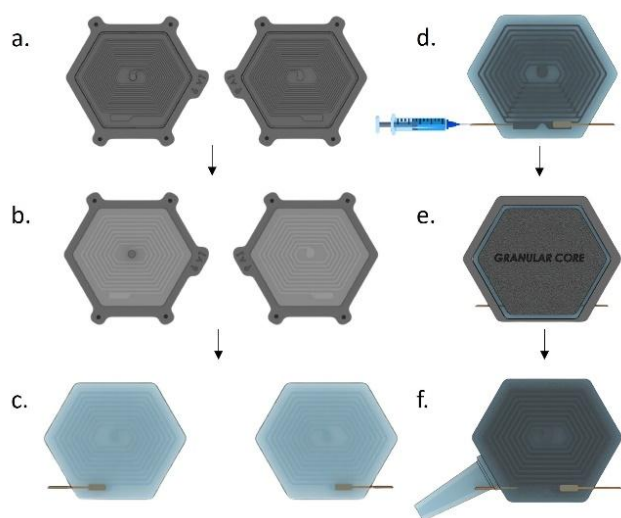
Composite preparation scheme: a) FDM printed coil moulds, b) coil moulds were poured in with silicone rubber, c) silicone rubber mouldings with elastic coils were inserted with electrodes, d) elastic coil moulding comprised of two glued together layers of silicon rubber, injected with liquid gallium, e) integration of the elastic liquid metal coil with granular core pocket, f) complete sample
